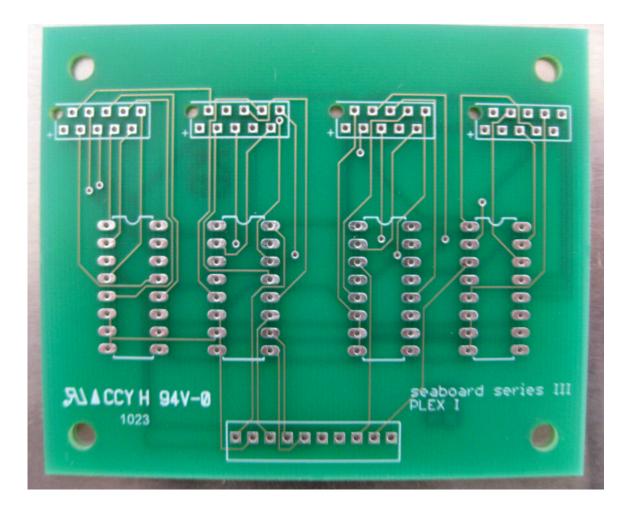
Seaboard 3 PCB (front view) February - September 2010
